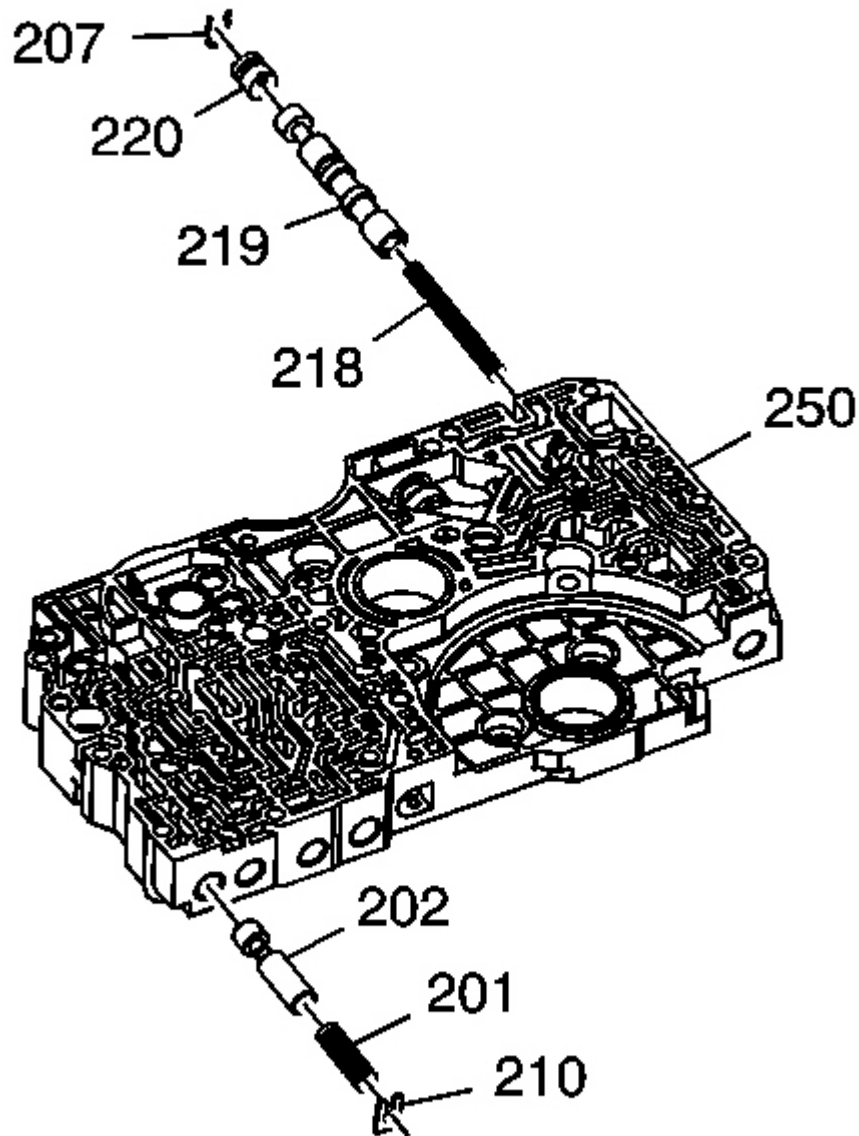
Main Control Valve Body, Bore Plug, Retainer Clip, Lock-Up Shift Valve & Return Spring
